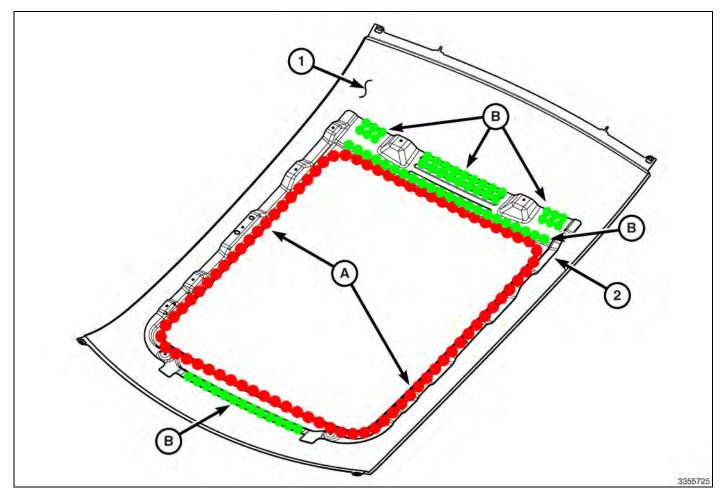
Dual Pane Sunroof Reinforcement (2 of 2)
